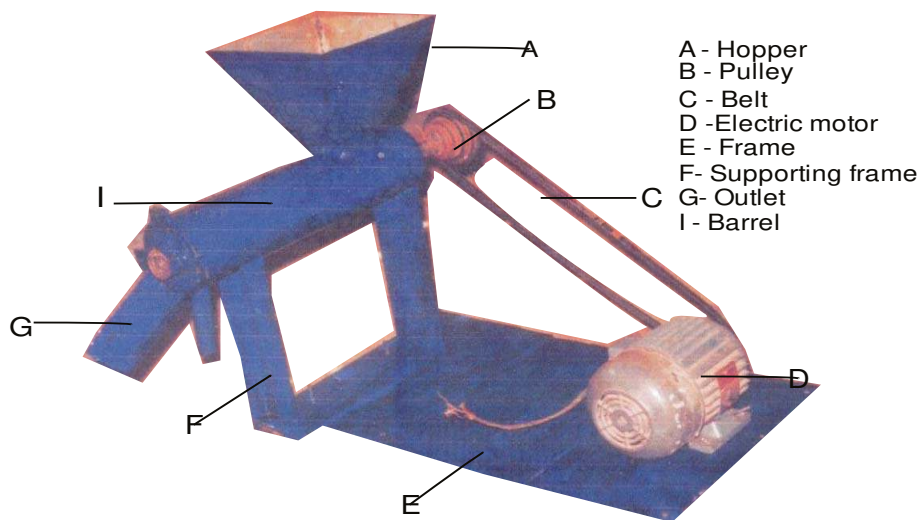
Pictorial view of the Oil Screw Expelling Machine
